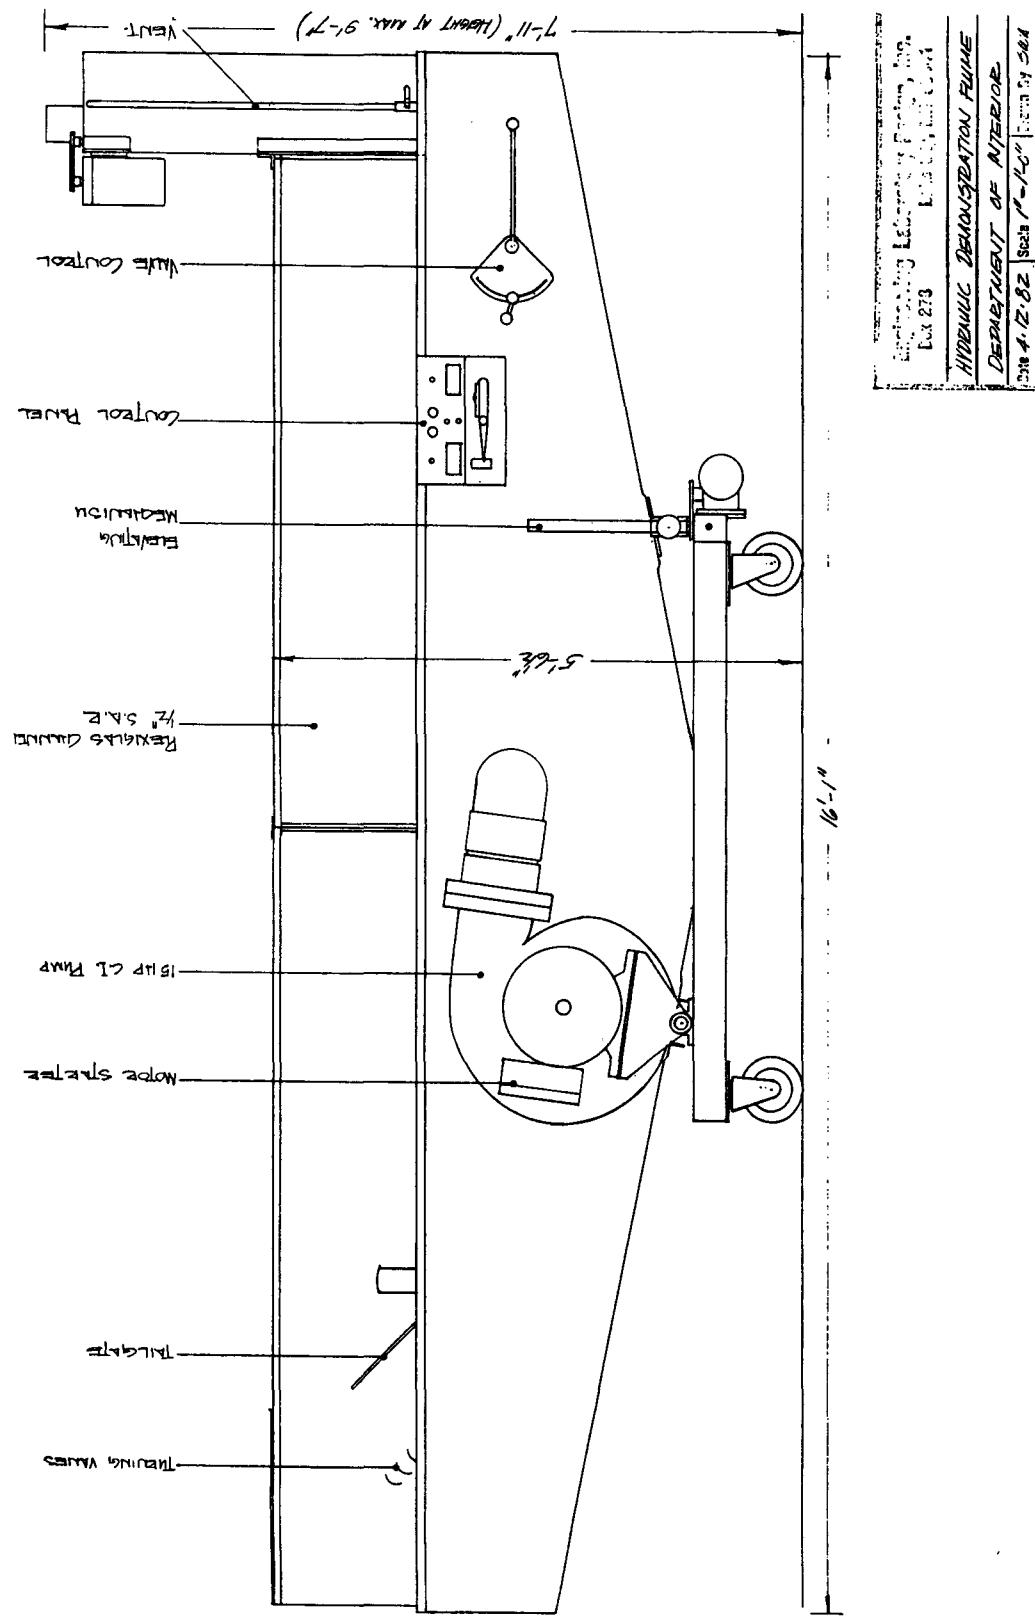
Hydraulic Demonstration Flume Drawing by Engineering Laboratory Design, Inc. (sheet 1 of 3).
